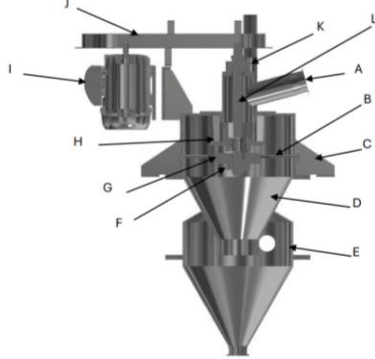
Main Components of an Air Classifier. (A) Rotor Housing; (B) Stay Bolt; (C) Upper Chamber; (D) Inner Cone; (E) Lower Chamber; (F) Lower Bearing; (G) Stay Bolt Ring; (H) Rotor Cage; (I) Electric Motor; (J) Drive Components; (K) Upper Bearing; (L) Shaft.
